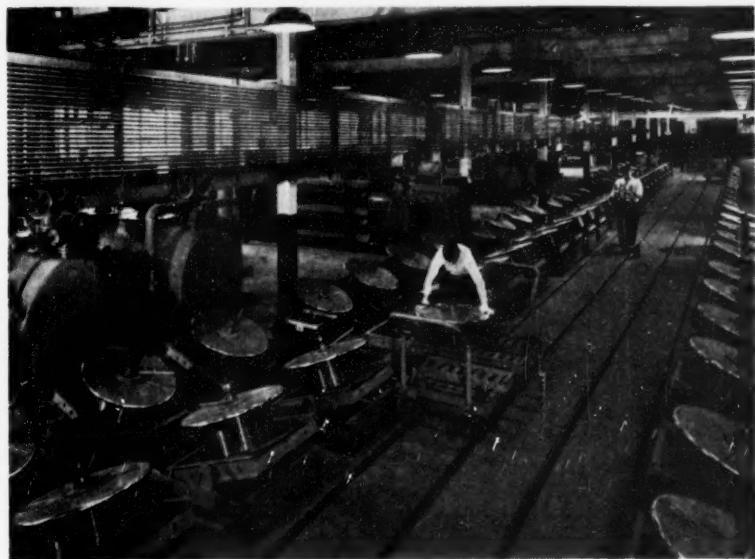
Steel wire supply stands, two for each of the twenty-five channels on a machine, permit continuous operation. A 450 lb. spool of wire is being positioned by the nearest operator while behind him another operator is electric welding a wire joint.
